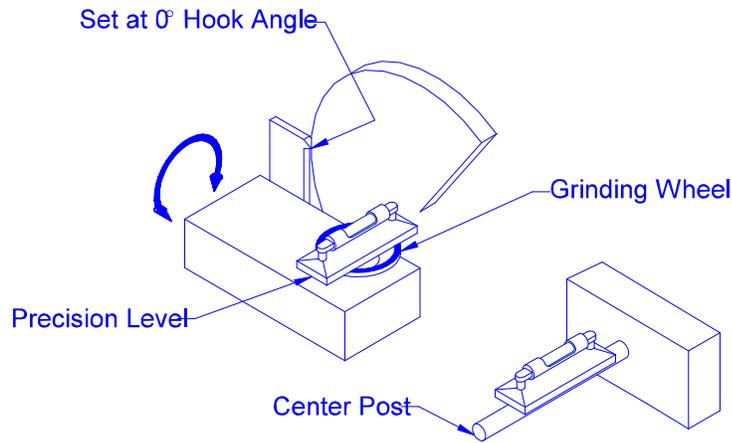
Top and Face Grinder. When the hook angle is set at 0° , the center post and the face of the wheel should be level.
